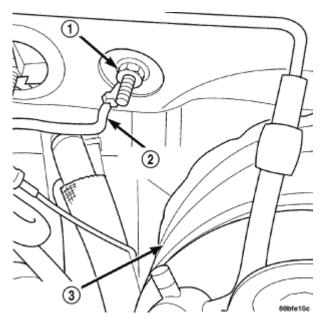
Removing/Installing Oil Cooler & Coolant Hoses Courtesy of CHRYSLER LLC
